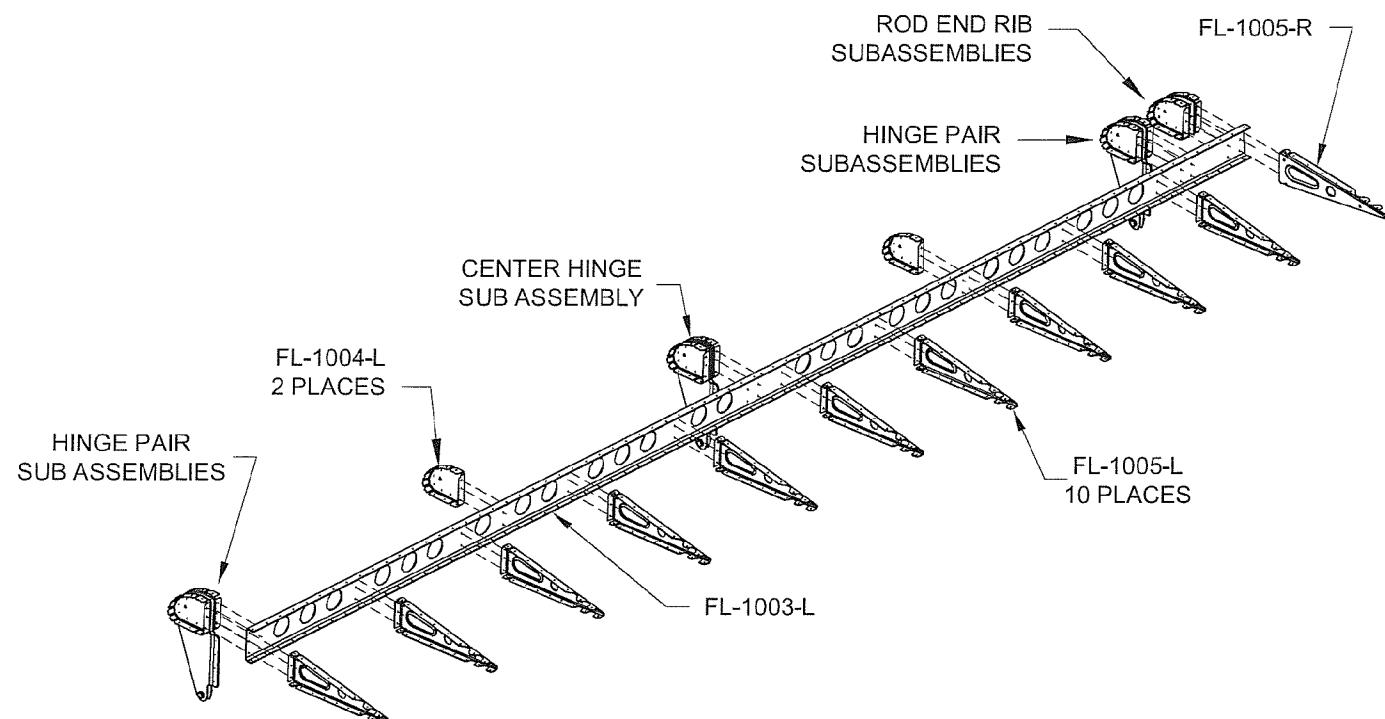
RIVETING RIBS AND SUB ASSEMBLIES
